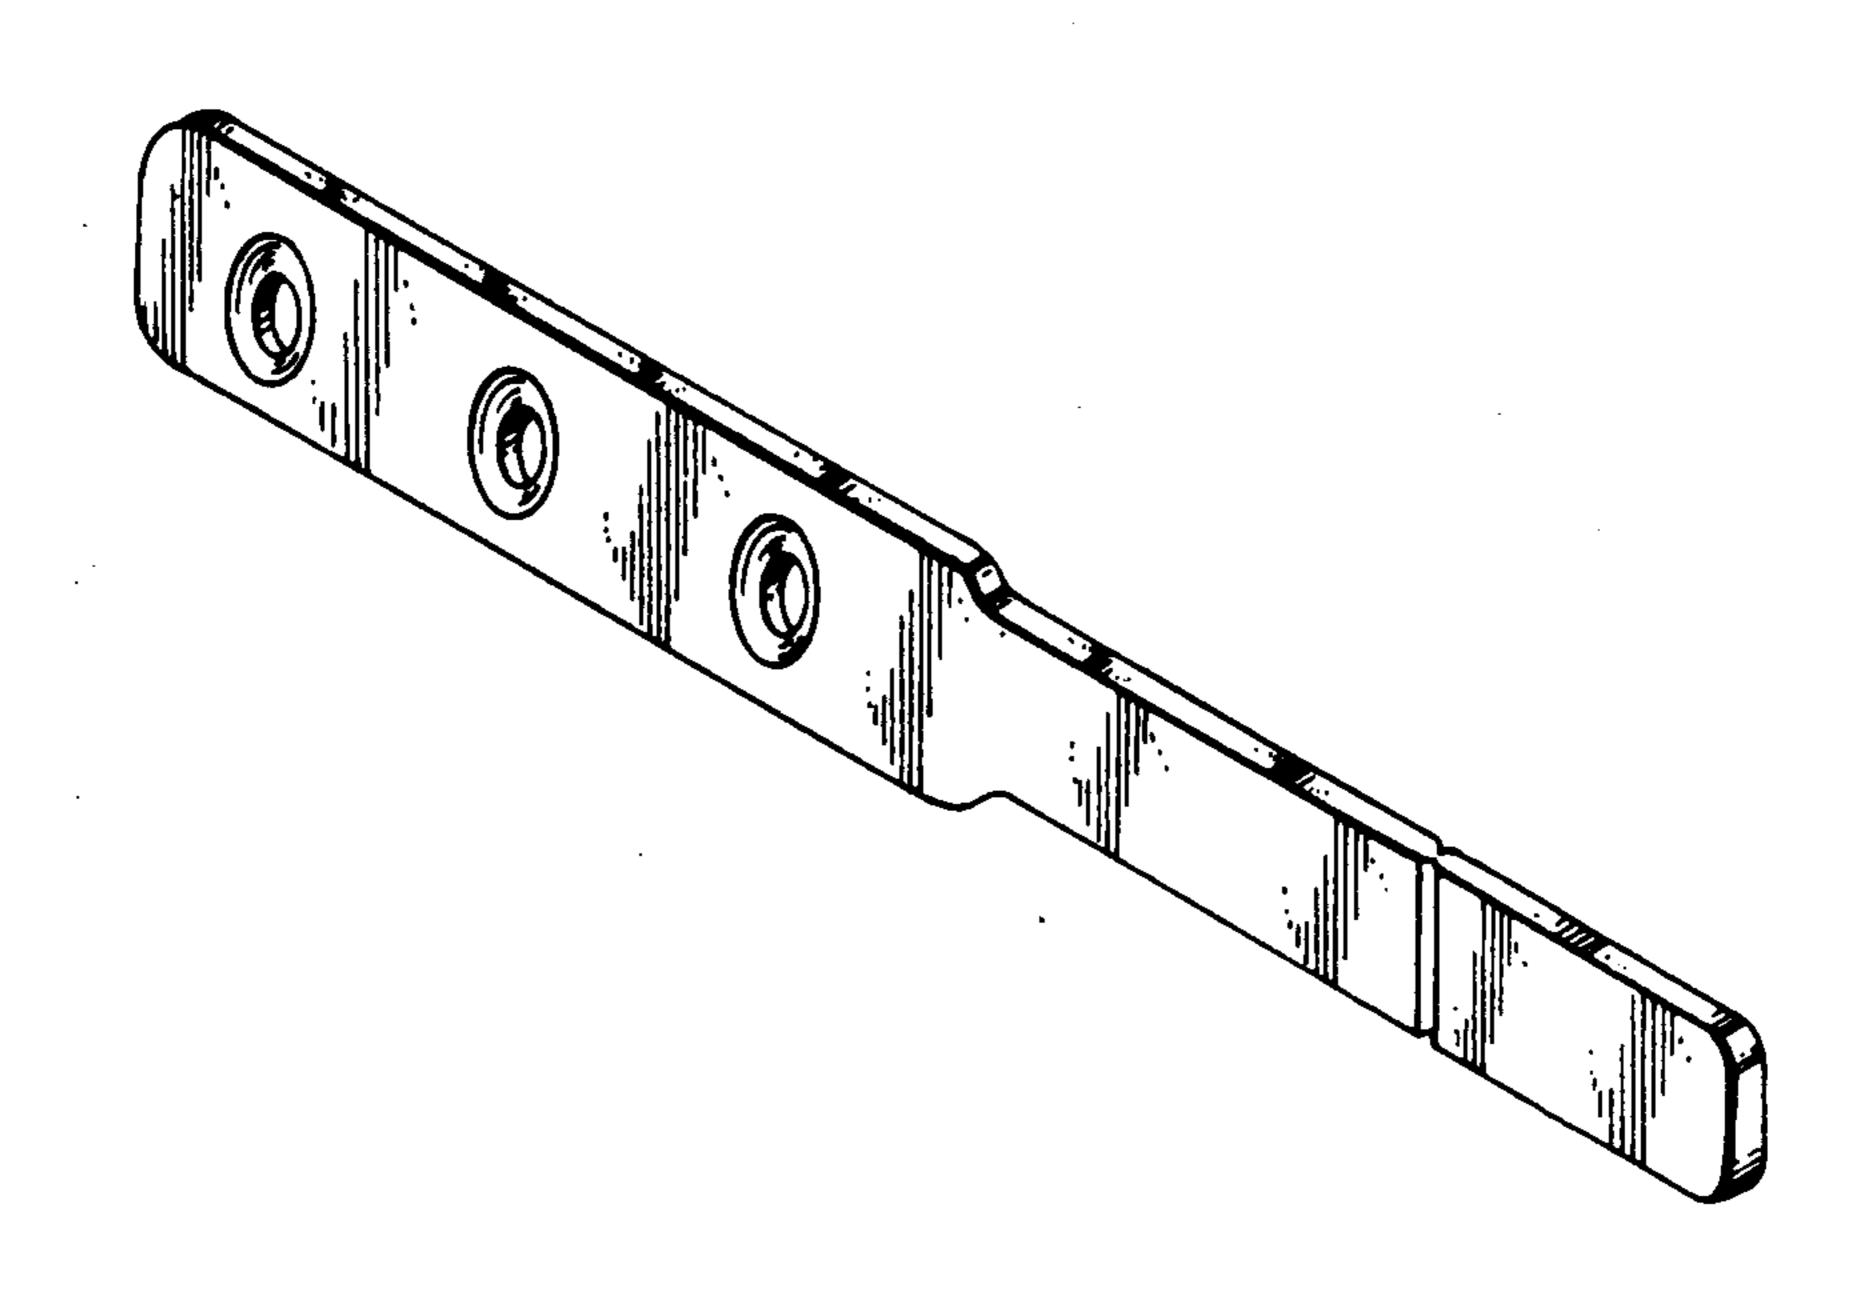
is a top, front, and right side perspective view of the fourth embodiment of FIGS. 1-5;
